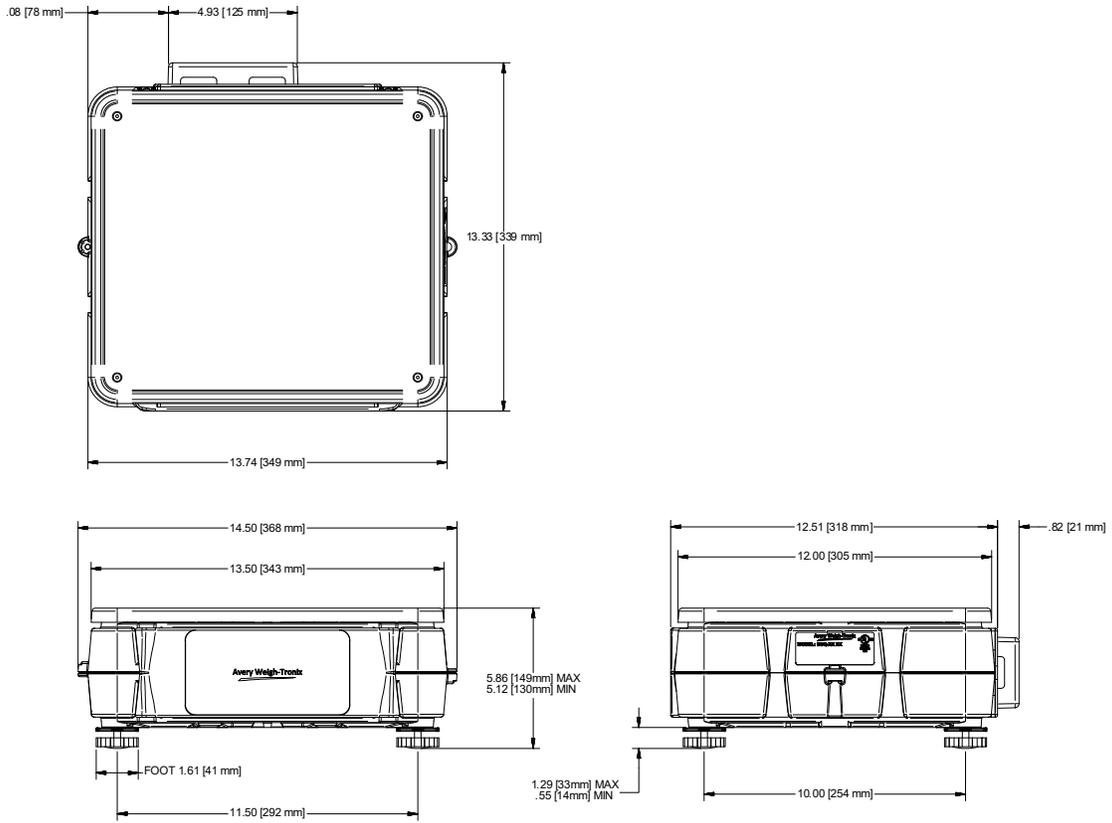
Model 1214 BSQ dimensions with PSU but no indicator
